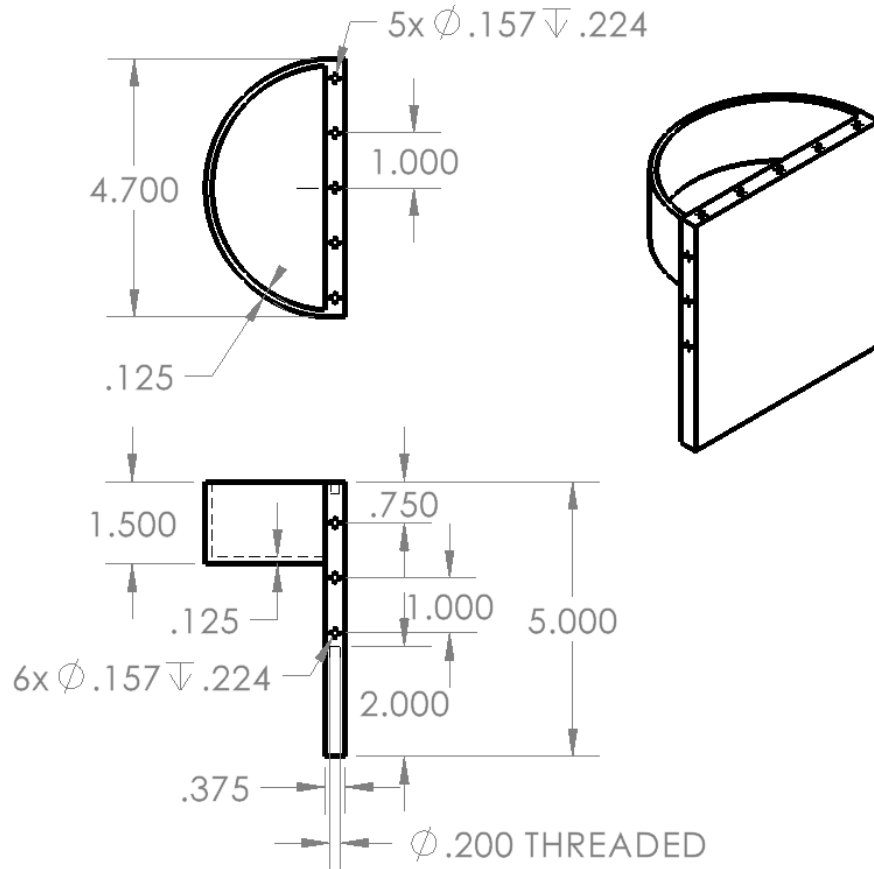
STEMnaut housing and electronics sled drawing (in).
